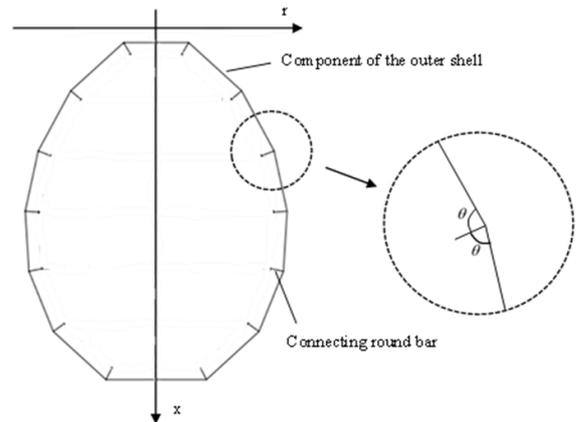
Design of the round bar connecting the outer and inner shells of the egg-shaped tsunami shelter.
